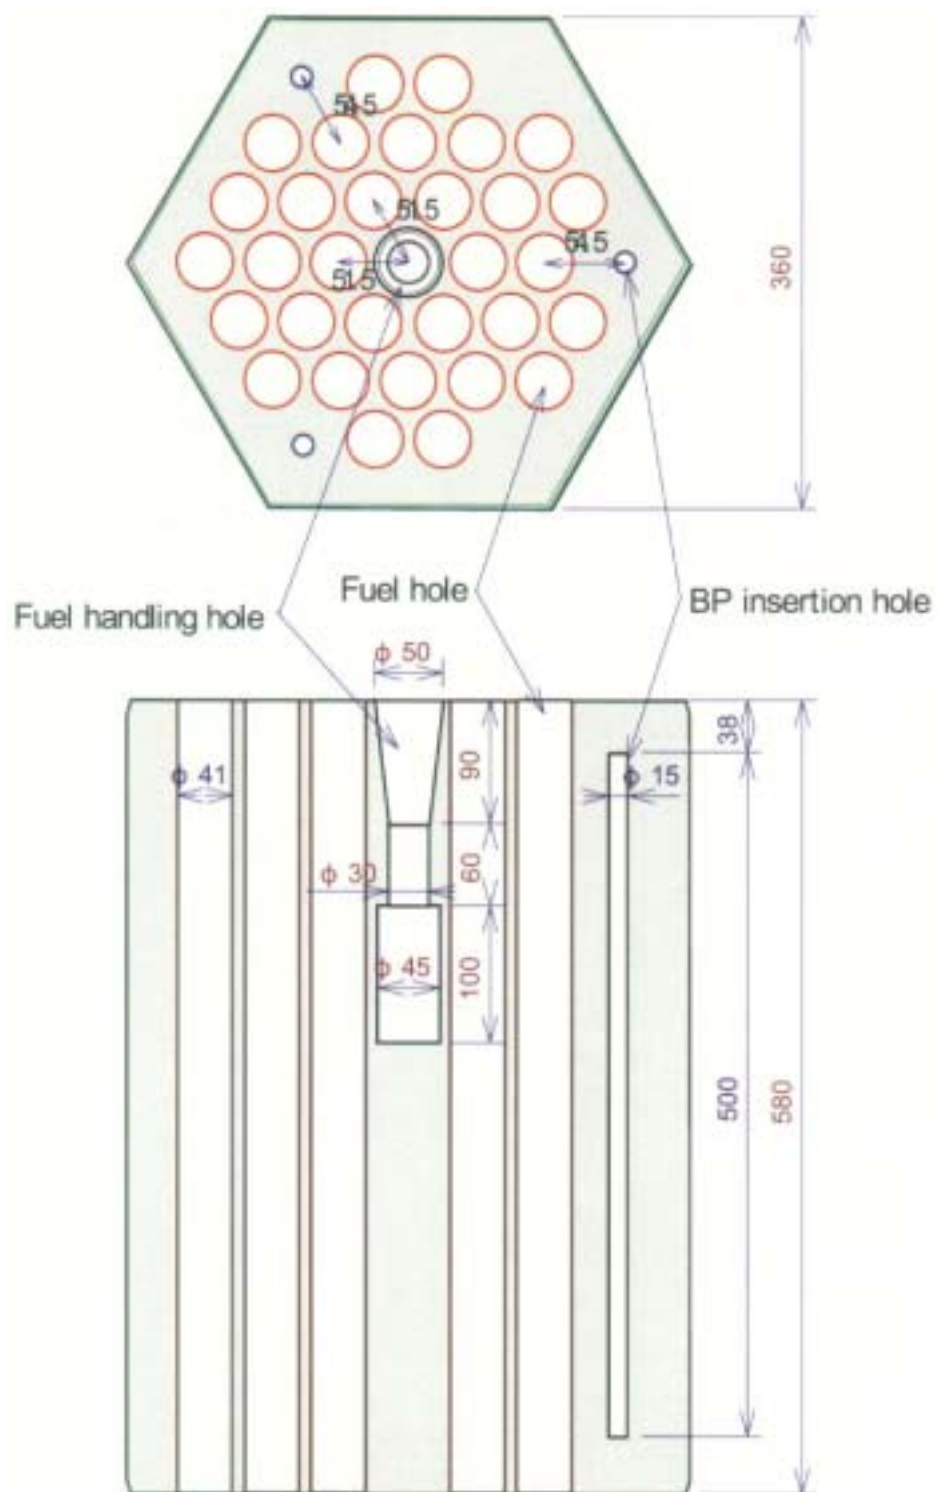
Fuel graphite block for 31.pin fuel assembly.
